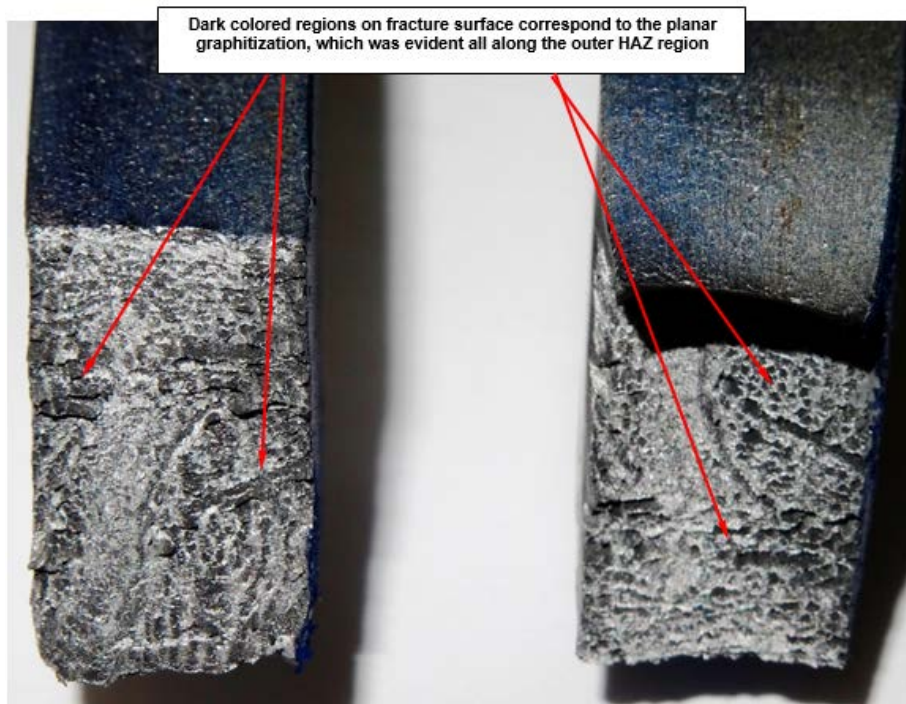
Close up view of the exposed fracture surfaces of the up stream HAZ tensile Sample of Welded pipe Sample B, which fractured along the HAZ outer interface region.
